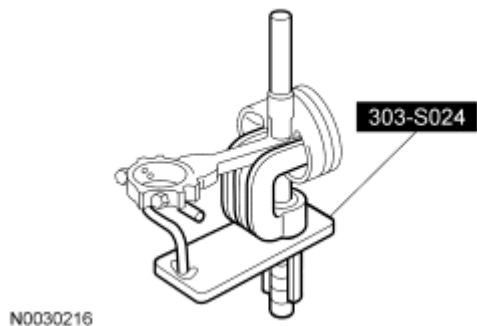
Pressing Piston Pin Into Connecting Rod Using Special Tool (303--S024)
